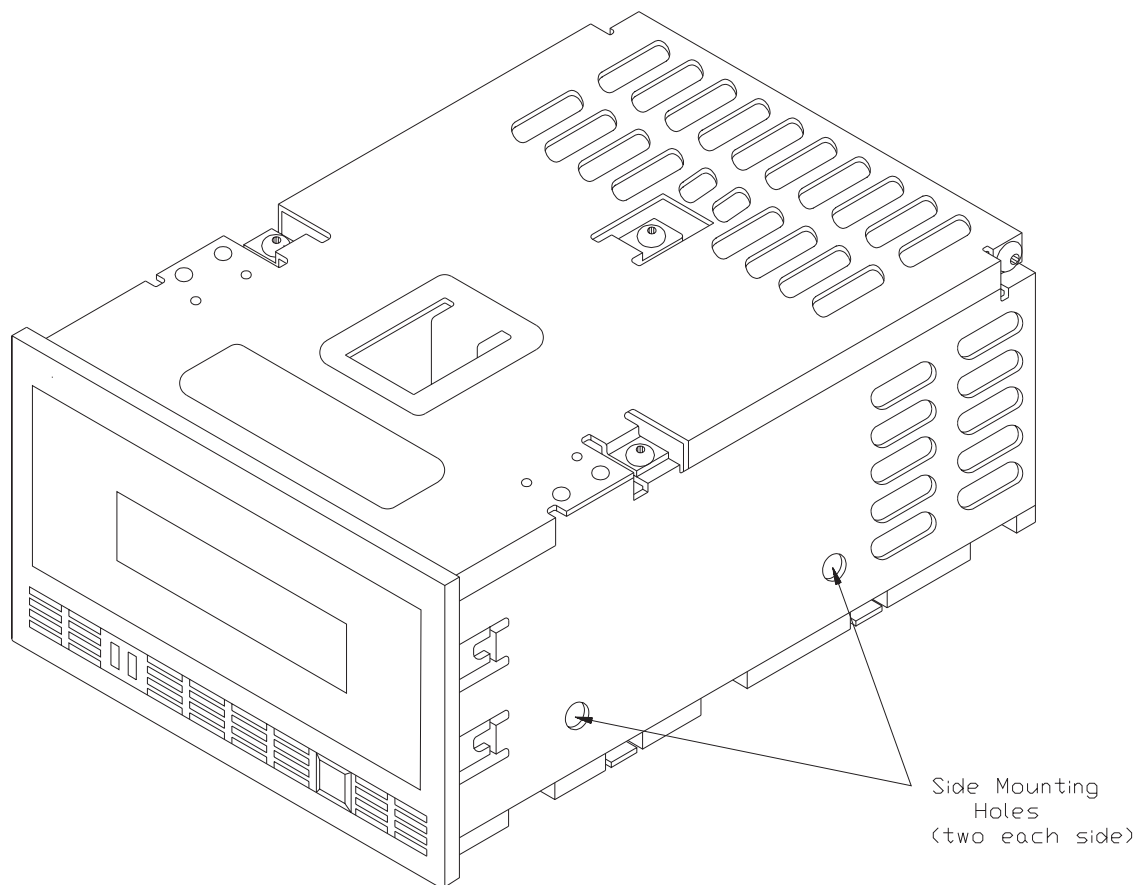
Location of Mounting Holes on the Sides of the EXB-8200
